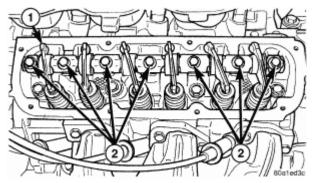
Rocker Arms & Shaft Courtesy of CHRYSLER LLC
